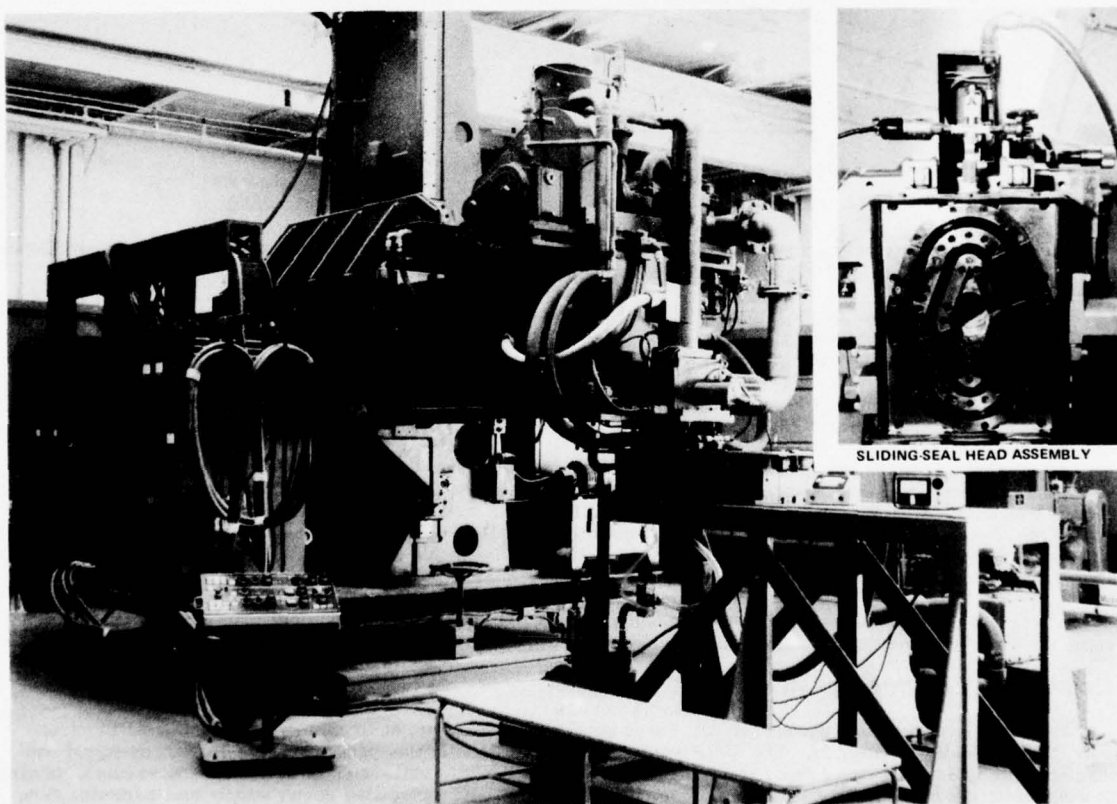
Sliding-Seal Electron-Beam Welding Equipment
